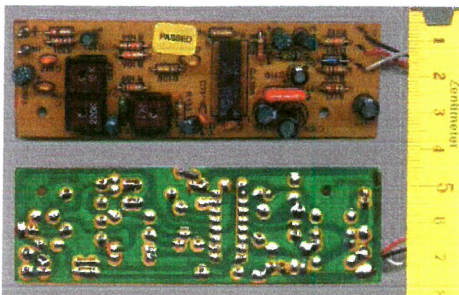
A single layer printed circuit board with traces and solder connections on one side and the soldered components on the other side.
